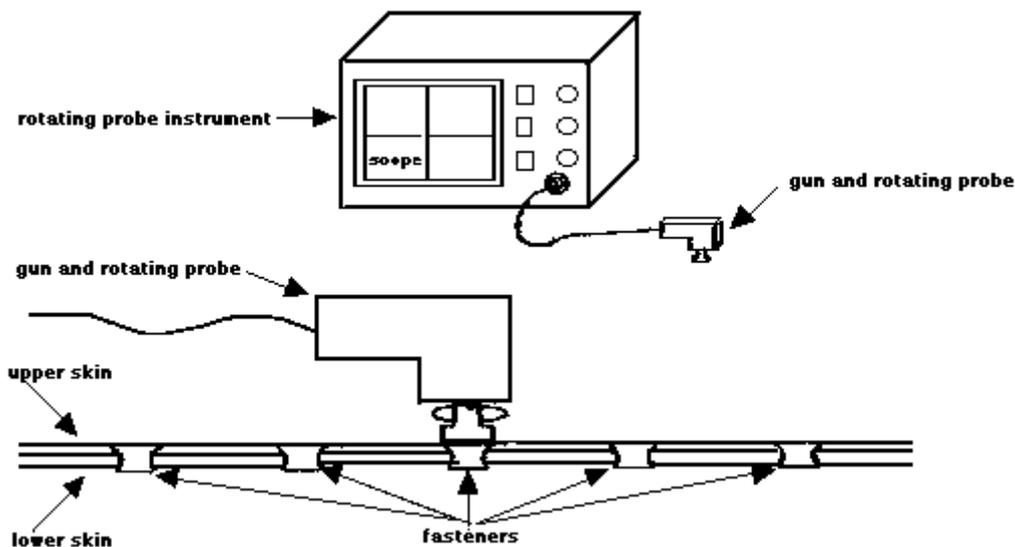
737 aircraft lap splice eddy current crack inspection using rotating probe technique
